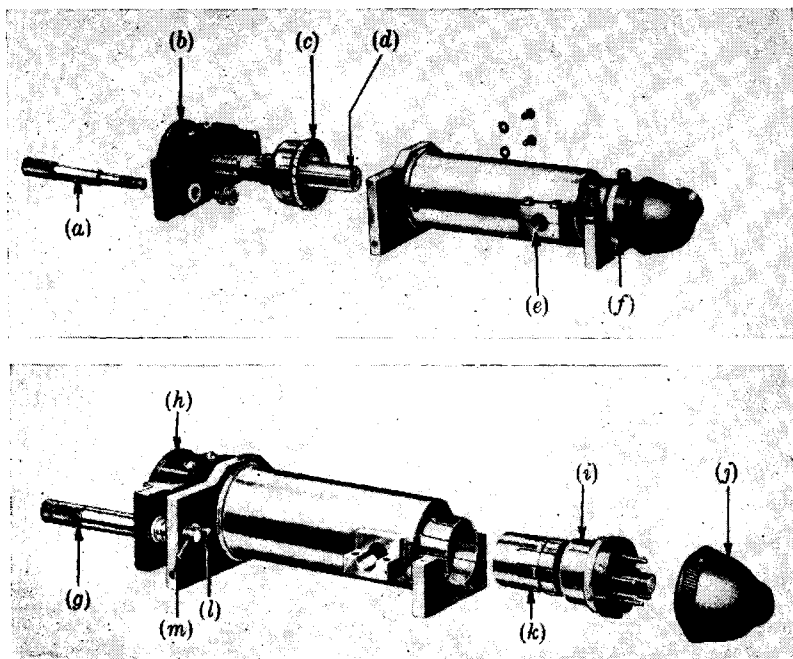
Exploded view of 2C40 cavity oscillator at 2900 Mc/sec. (a) Fine-tuning control. (b) Coarse-tuning control. (c) Plate choke. (d) Plate-tuning plunger. (e) Capacitive r-f pickup probe clamp. (f) JAN-2C40. (g) Fine-tuning control. (h) Coarse-tuning control. (i) JAN-2C40. (j) Tube socket. (k) Grid cylinder (in place). (l) Stop. (m) Limit pin.
